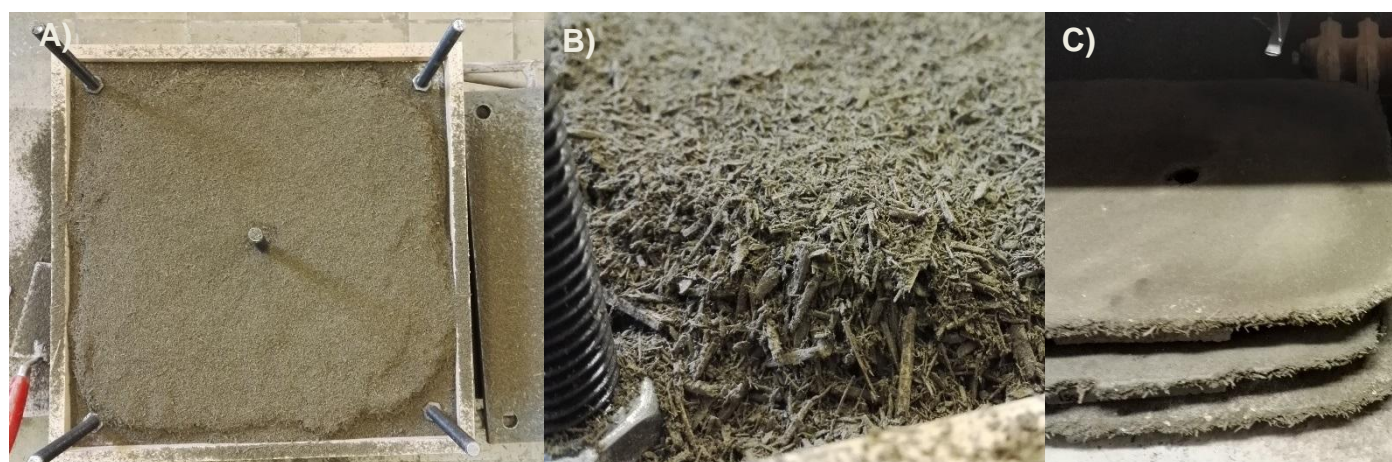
Manufacturing of CBPB – A) mould and wooden frame with layered fresh mixture; B) detailed view of layers; C) thermally treated boards (before specimen preparation - cutting)
